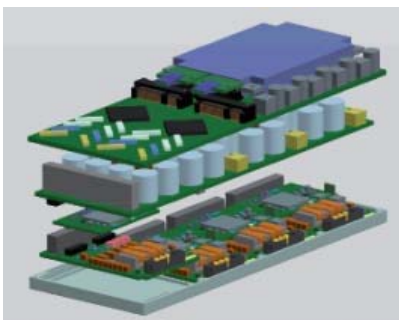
SARA Drive Control unit for 16 Sensors and 4 Motors
